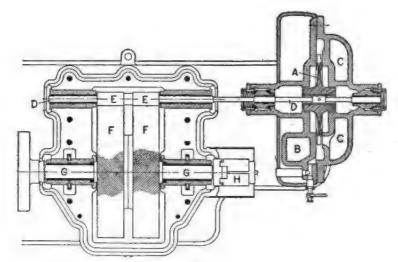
Section of 30 Horse-power De Laval Turbine, with wheel about 8" in diameter at 20,000 R.P.M., vane-velocity about 700 ft. per sec.
